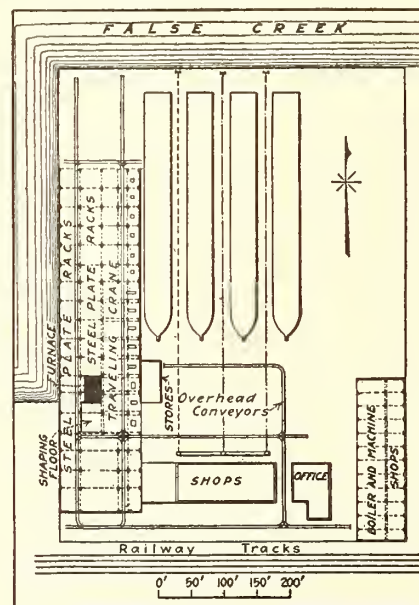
J. Coughlan & Sons Steel Shipbuilding Yard.
